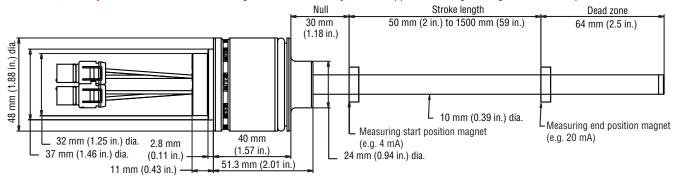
MH-Series Model MT rod-style sensor dimension reference
